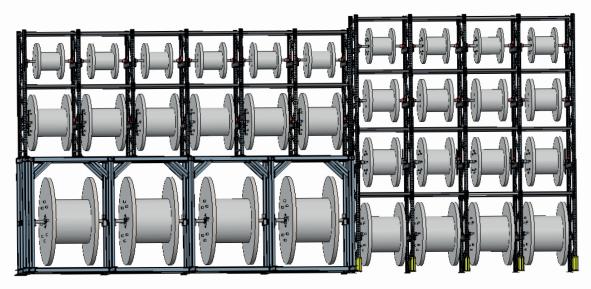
Model of ABROL heavy-load cable drum rack combined with LAGROL cable drum rack
